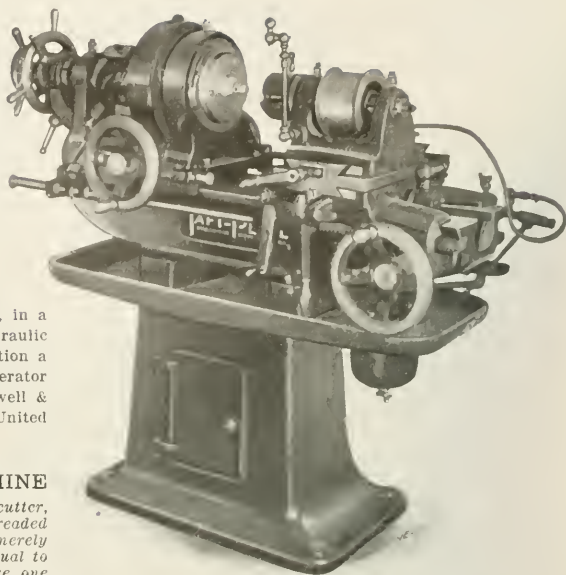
End View showing Arrangement of Slides on Cutter-head
